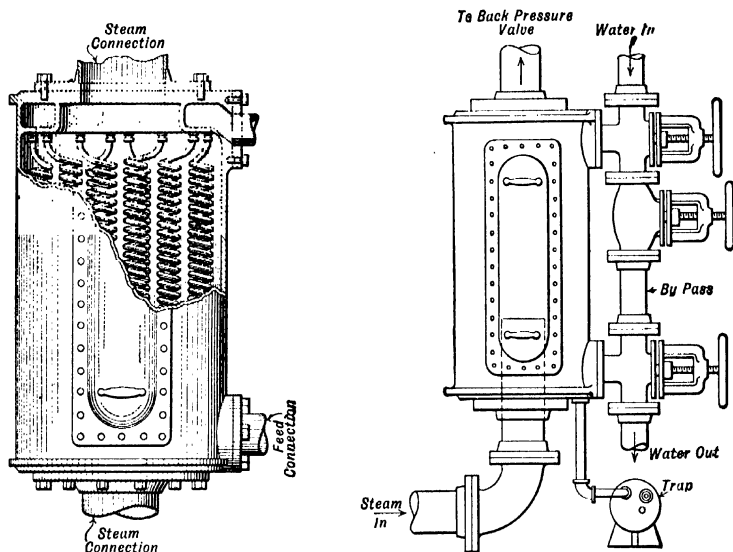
Reilly Multi-coil Exhaust Steam Heater and Piping Connections for through Type of Heater.
